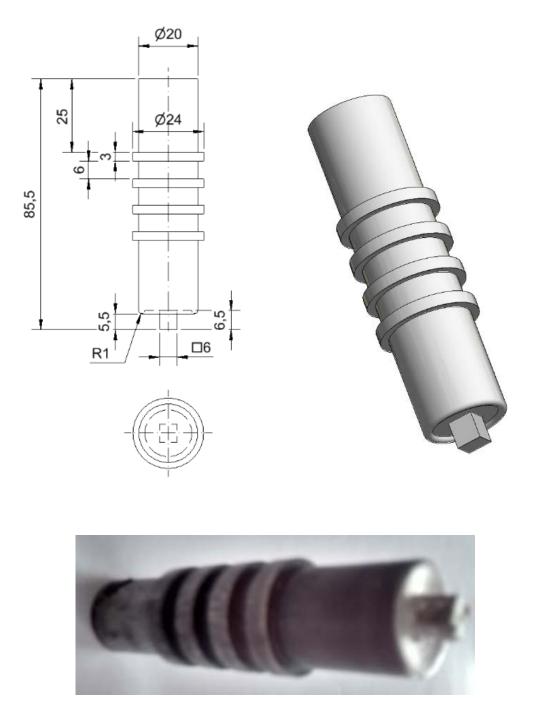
Tool square pin and shoulder with semicircular ring at the edge (C3)
